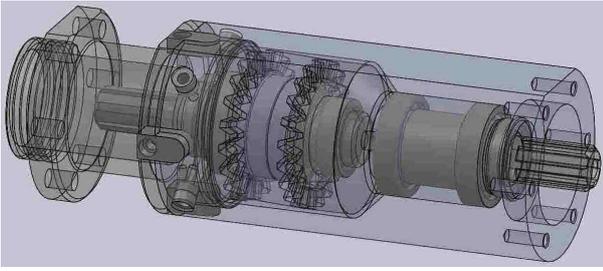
Coaxial gearbox based on a bevel gears with a small shaft angle
